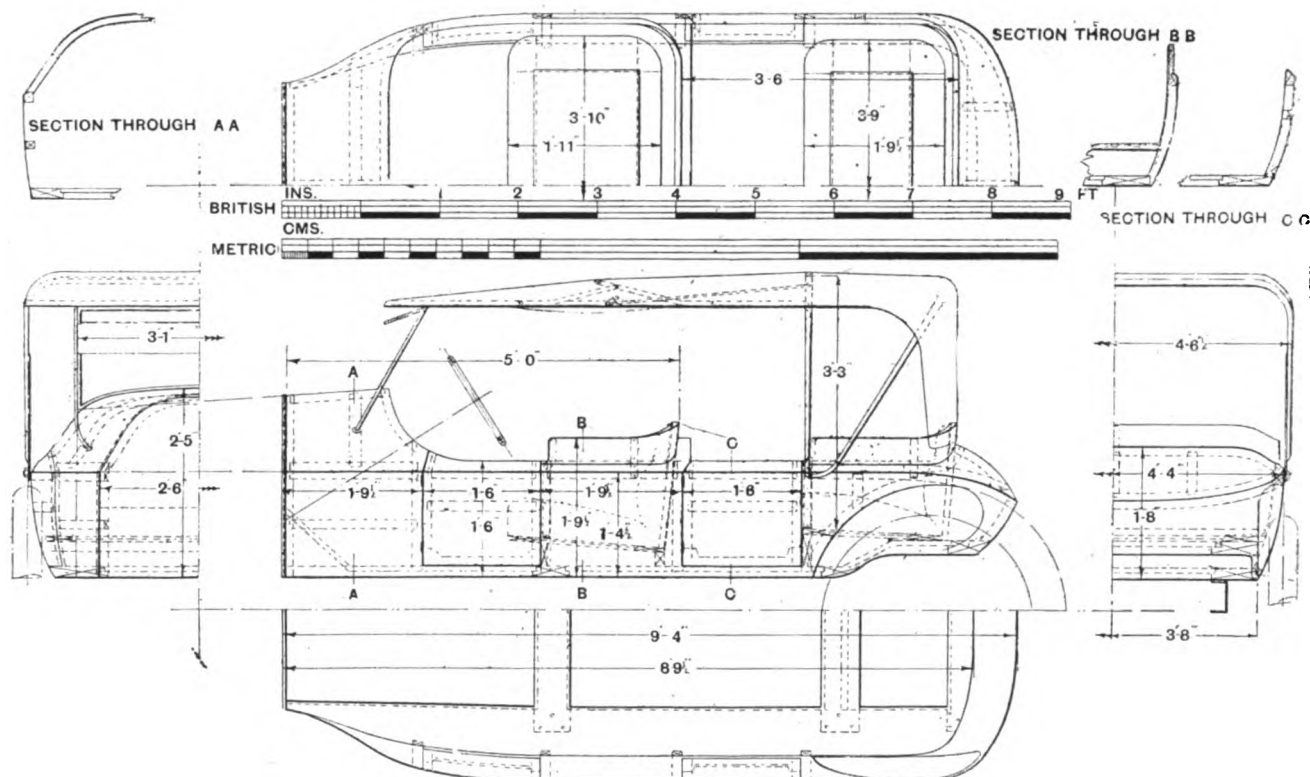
Working drawing of the actual body, indicating principal dimensions in feet and inches.
